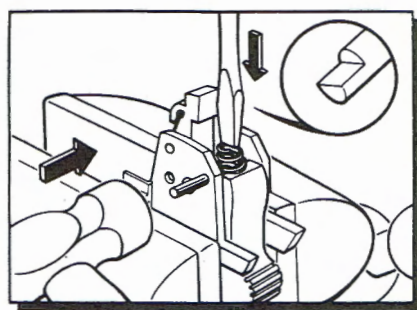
The hardest section on this gun to disassemble or assemble is the hammer group, but after removing the hammer spring retainer pin (N), the other pins may be removed easily. To reassemble, replace all parts but the hammer spring. Using a screw driver or tool shown in the insert, depress the spring (I) deep enough to allow the pin (N) to hold it. Then tap the pin all the way through.
